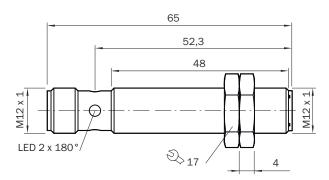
IME2S12-04B4DC0S02 dimensional drawing
